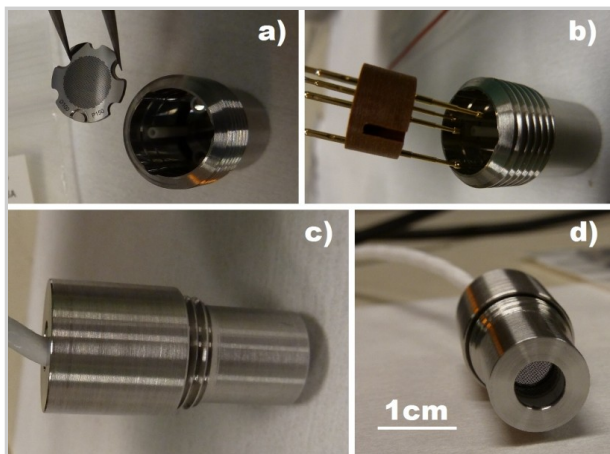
Assembly of a hybrid RPA. a) Micromachined grids are placed in a stainless steel housing, alumina spacers and guiderails enforce alignment and separation distance. b) Contact is made to each tungsten-coated electrode through gold pogo pins. c) and d) Completed assembly.
